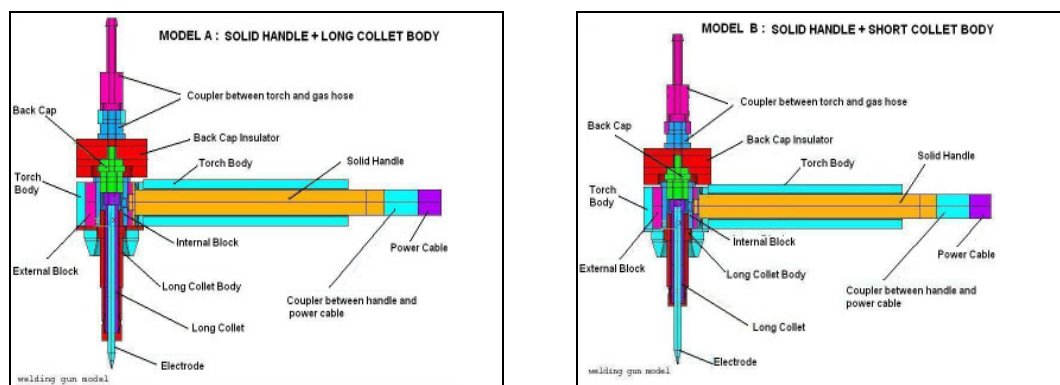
Cross-sectional view of welding torch model A and B.
